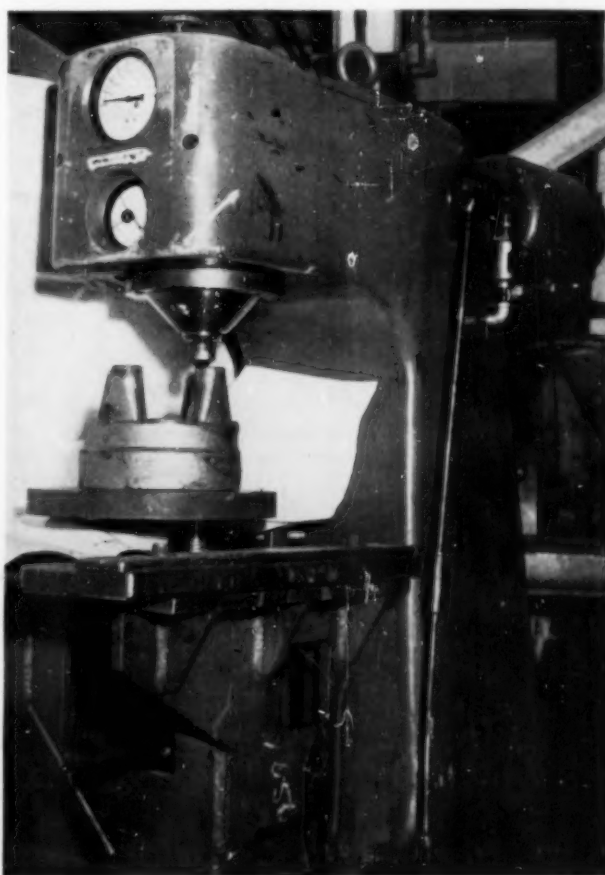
Casting being hardness tested in direct reading hardness testing machine.
